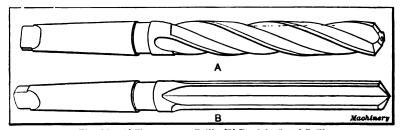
A) Three-groove Drill. (B) Straight-fluted Drill
